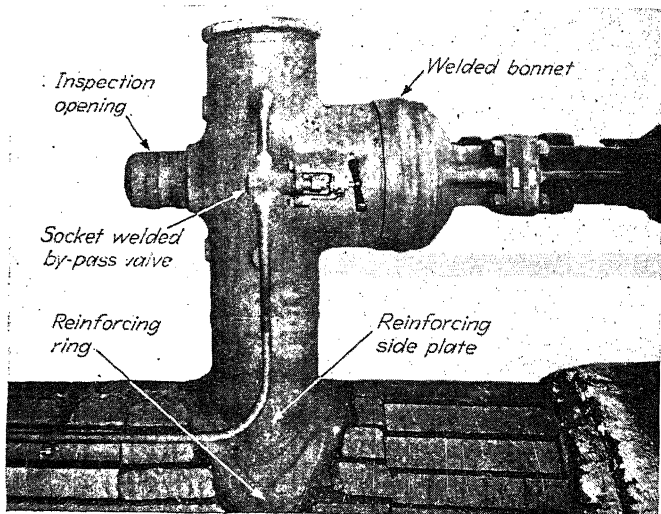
Reinforced welded branch connection and welded-bonnet valve.
